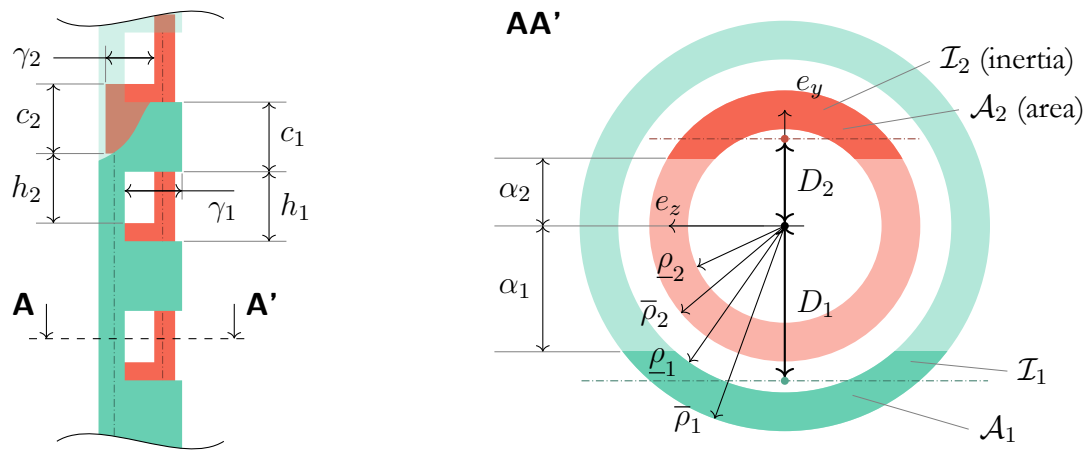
Partial front view and sectional view of a CAAR. Left, the front view displays the geometrical parameters of the notches of tubes 1 and 2. Right, the sectional view corresponds to the AA' cross-section of the front view. The clearer parts show where the notches are cut out of the tubes, offsetting the neutral line (dash-dot lines).
